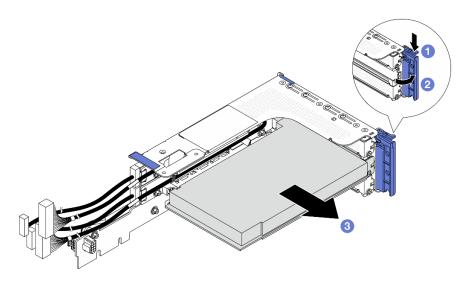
Removing a PCIe adapter from the 3FH riser cage
